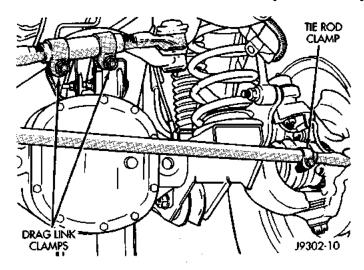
Tie Rod/Drag Link Clamp Bolt
